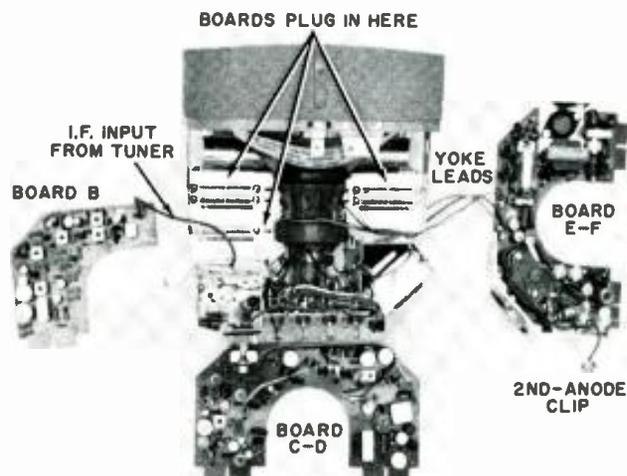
The three printed chassis boards may be unplugged. This permits easy access to components on and off boards.
